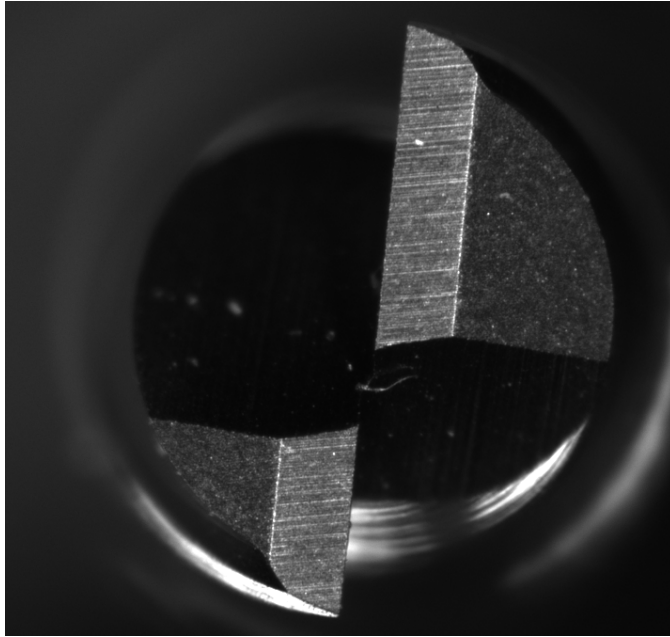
Asymmetric flute (bottom view of a 2mm milling tool)
